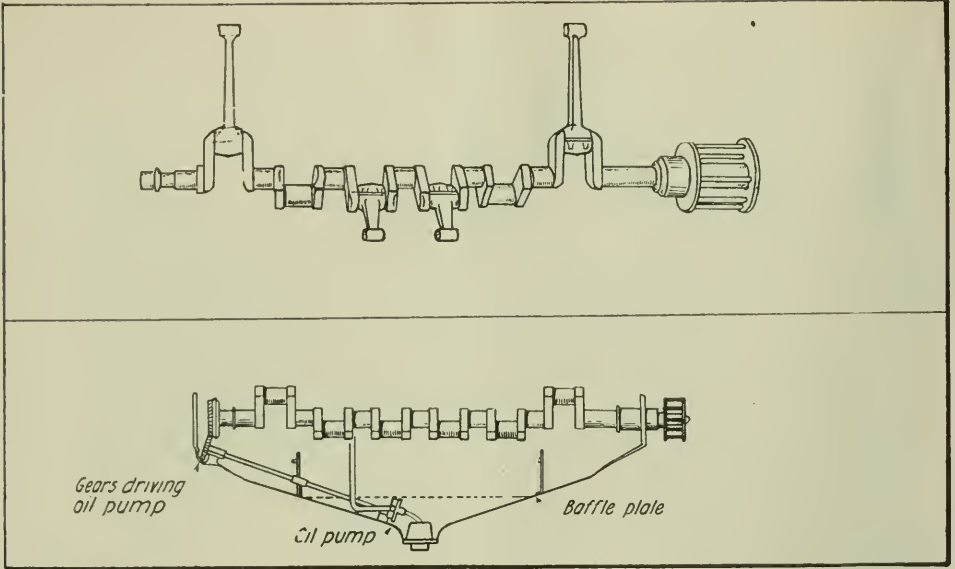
(upper)—Crankshaft of 6-cylinder engine
